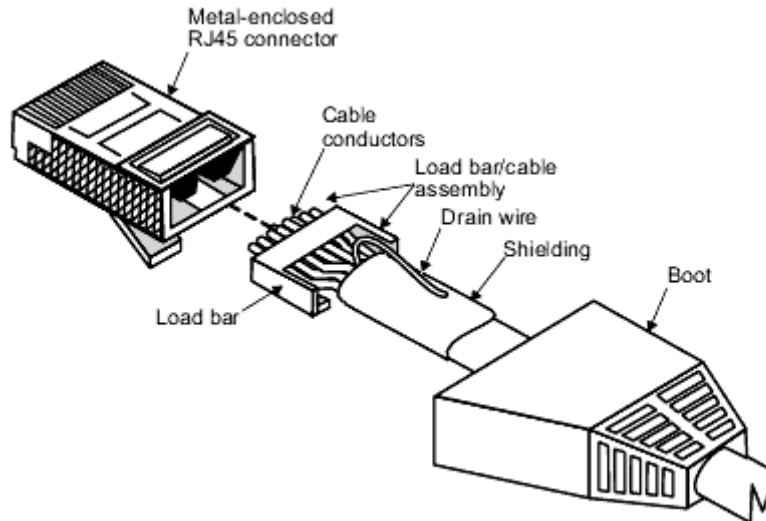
Shielded, Metal-enclosed RJ45 Connector
